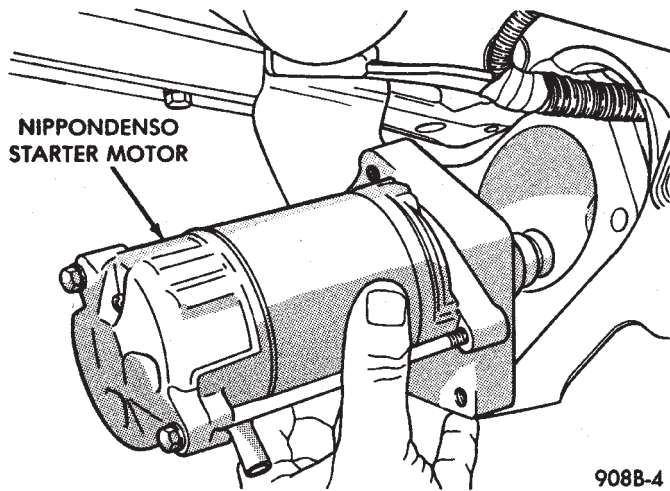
Remove/Install Starter—Nippondenso—Typical
